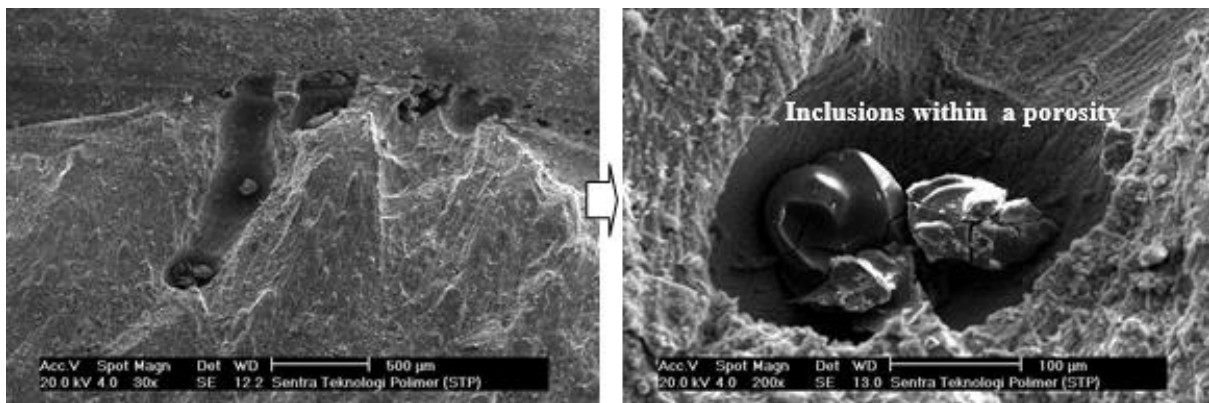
SEM micro fractography of the through fracture surface obtained from the leak area of the weld joint between the header and the sidebar/parting sheet, showing some inclusions within the weld defect
